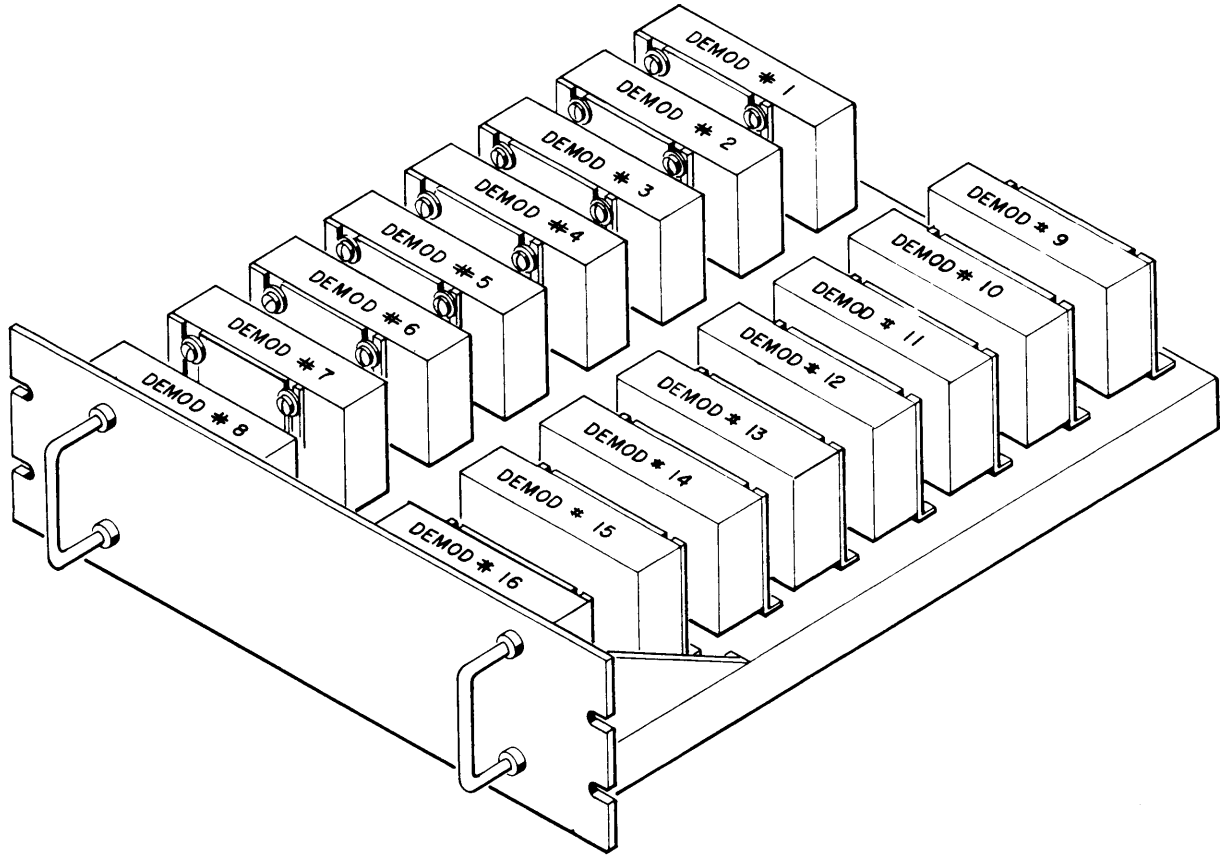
AN/FGC-60/22 Demodulator Tone Converter Drawer, Isometric View
